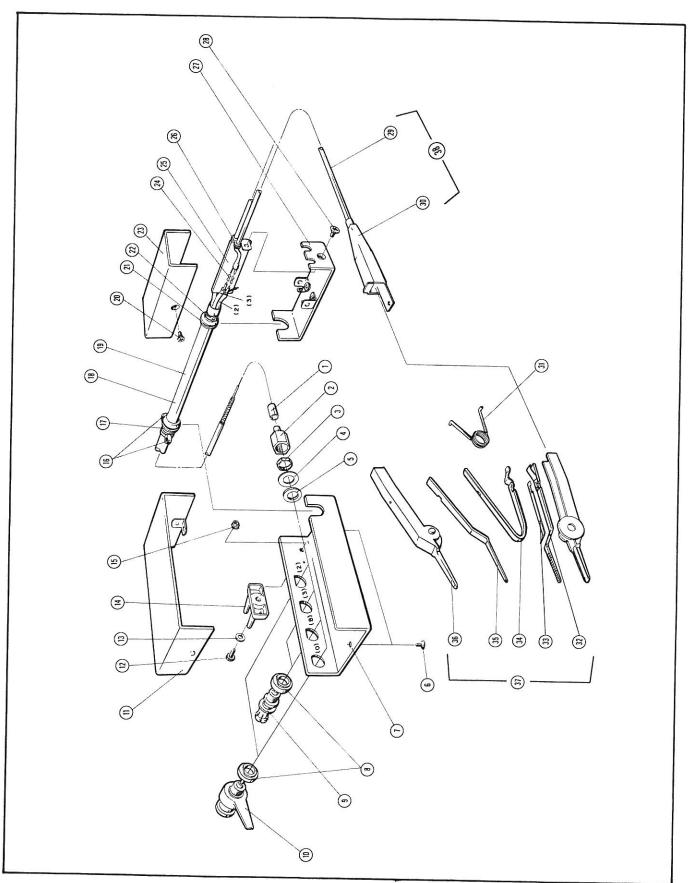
Parts Identification for 16048C (Sheet 1 of 2).
